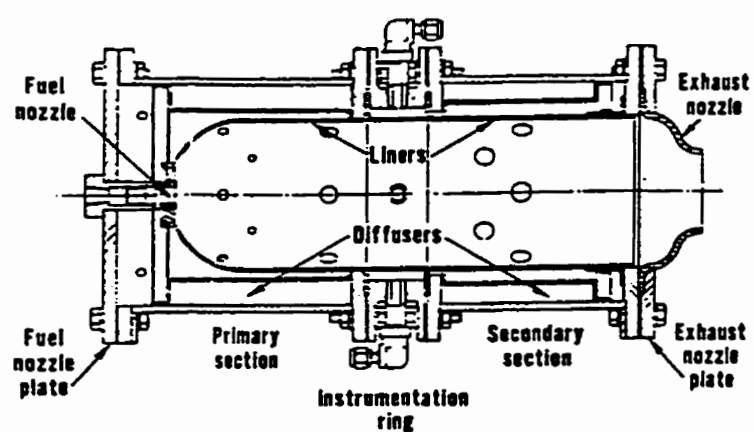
Schematic cutaway view of the combustor of the IAR burner rig (after [80]).
